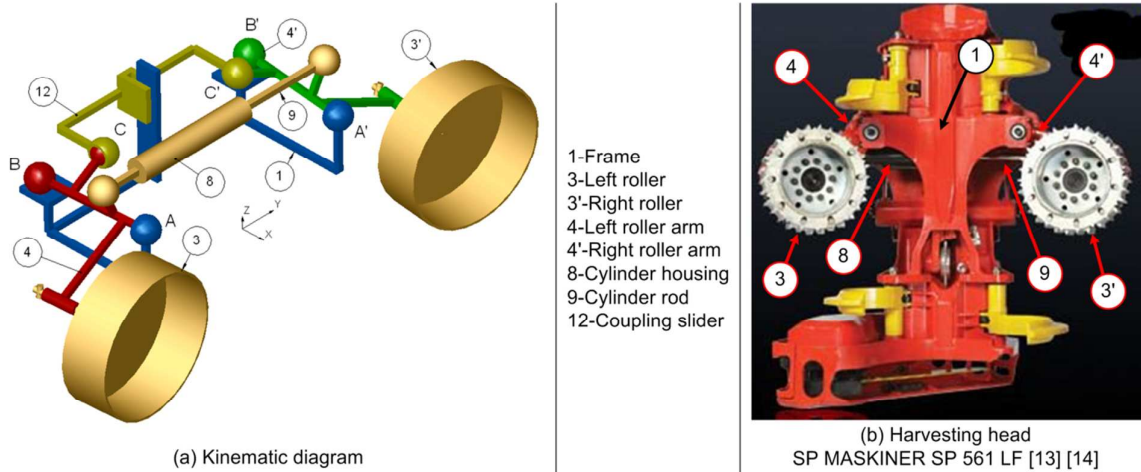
Roller arms moved by a symmetrically balanced gripping mechanism
